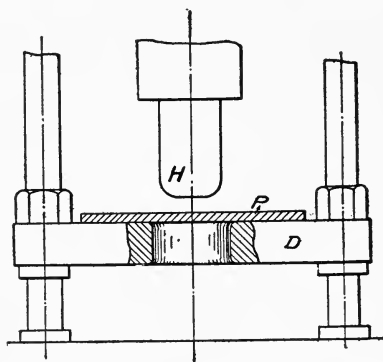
Making Hot-Drawn Tubes. Press for Cupping Discs.
